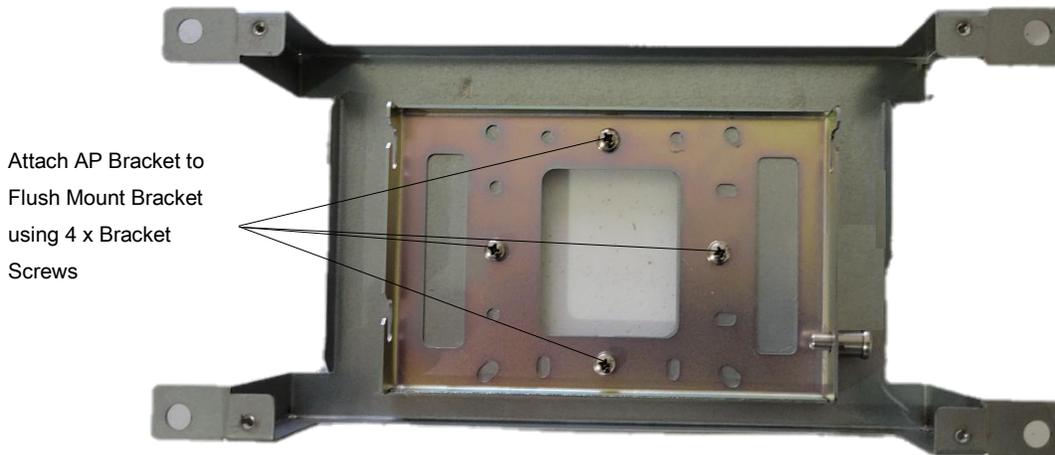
APV3-DAS - Mounting Standard Mounting Bracket to Flush Mount Bracket
